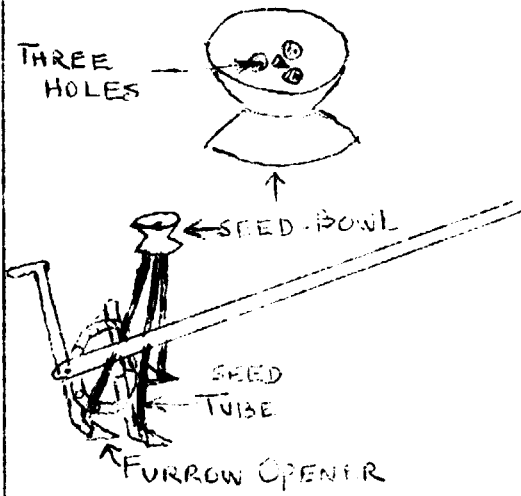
TOOLBAR WITH 3-ROW SEED-DRILL.
